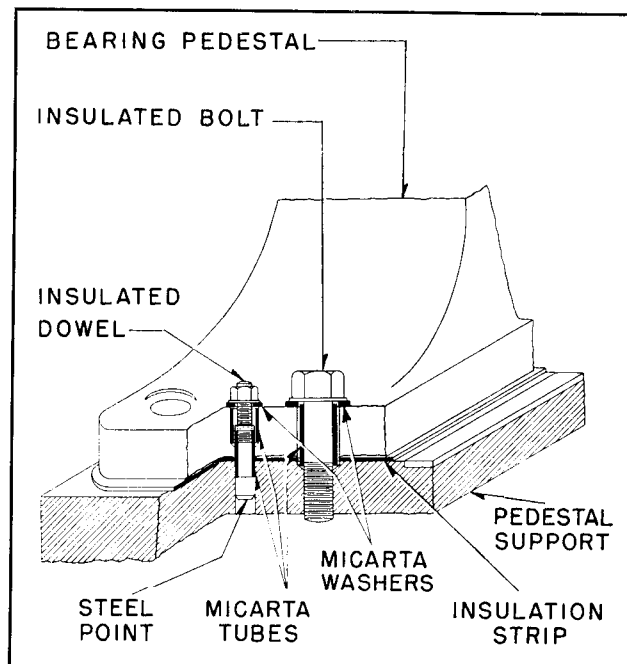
Method of Insulating Bearing Pedestal from Bedplate
